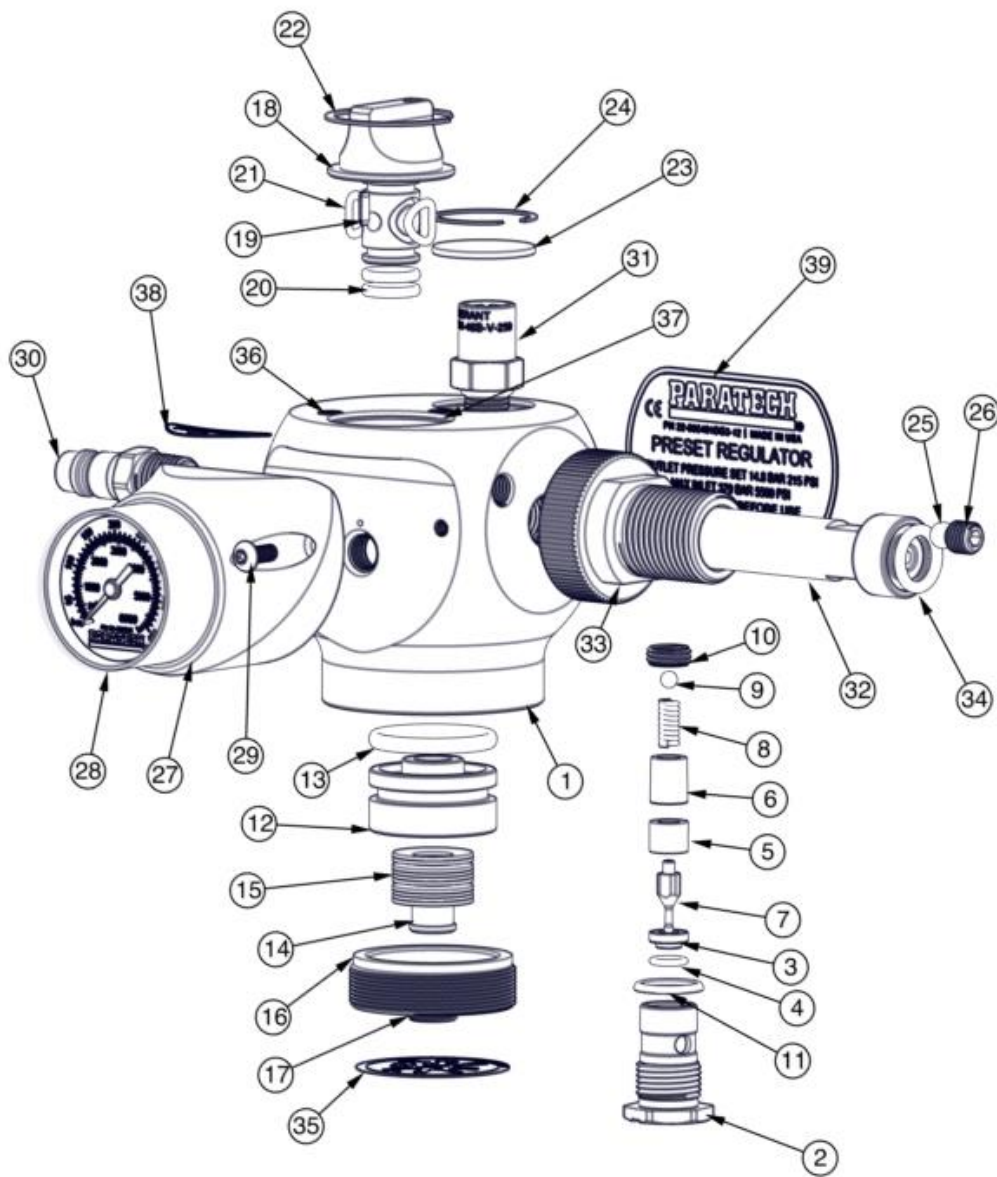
22-895401DG3-12 Regulator 12 ALB G3 Preset DIN Exploded View
